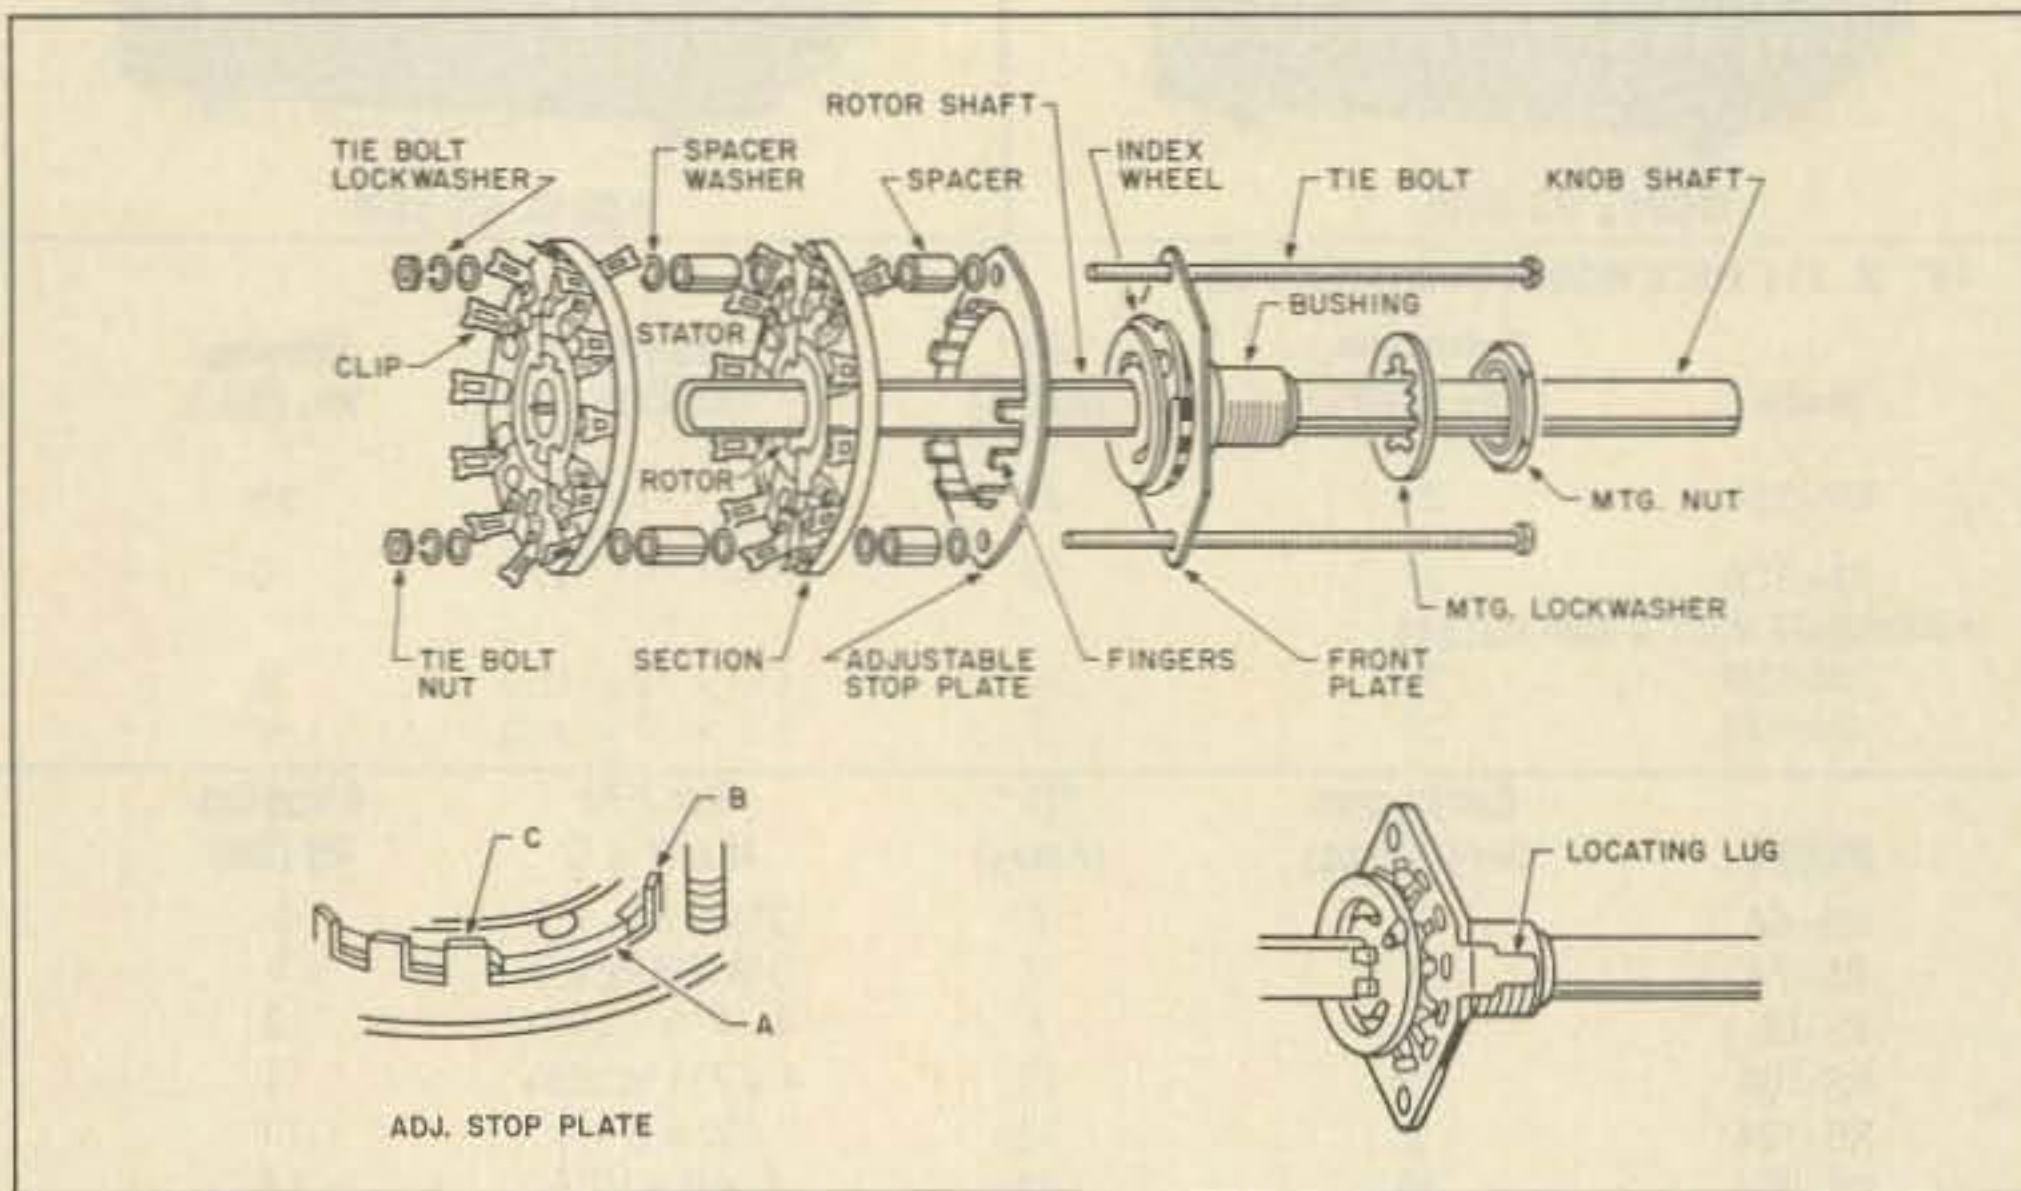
Exploded view of the Centralab PA-1000 and PA-2000 rotary switch.
